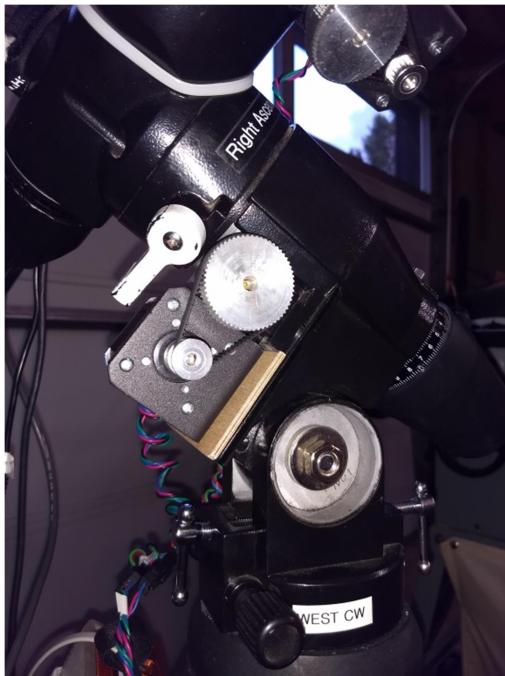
View of RA axis. 20 tooth (5mm hole) /60 tooth(6mm hole) timing gears and 80 tooth GT2 belt. NEMA17 Stepper motor/modified NEMA 17 bracket on 1/8" plywood spacer.
